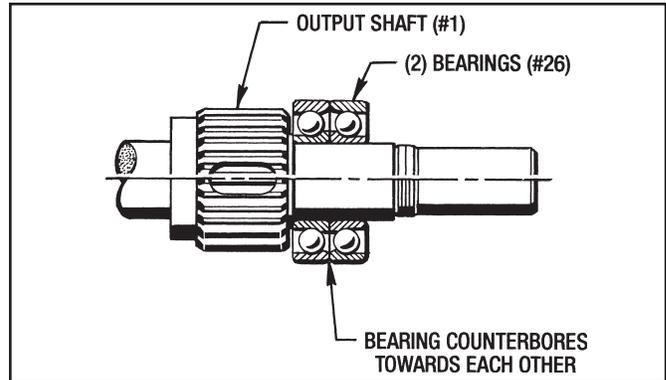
Installing Bearings (#26) (Without Force Lube)
